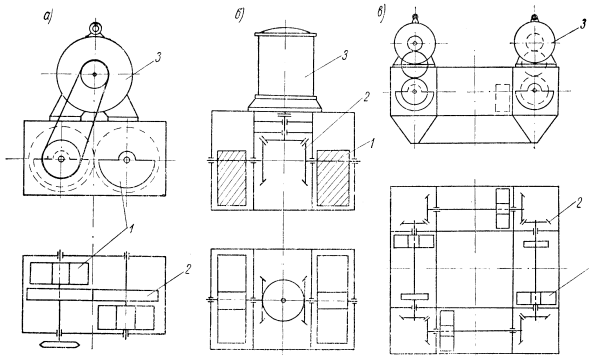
Diagrams of arrangements of vibratory drivers using both longitudinal and rotational oscillations. Left: two-shaft arrangement with parallel shafts. Centre: two shaft arrangement with coaxial shafts. Right: four shaft arrangement. Key: 1) eccentrics, 2) gears, 3) motors. (From Savinov and Luskin (1960))
